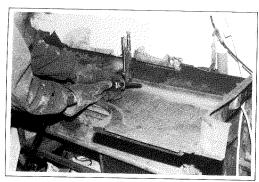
Just a little cheat for the camera to show the wing top clamped into position and me pretending to plug weld it on having already completed the job earlier sans said camera. Make a few well spaced welds first to ensure the correct positioning of the panel and then work your way along in between. For a good tight join, always weld close to a clamp. Finish off with seam sealer and paint.
